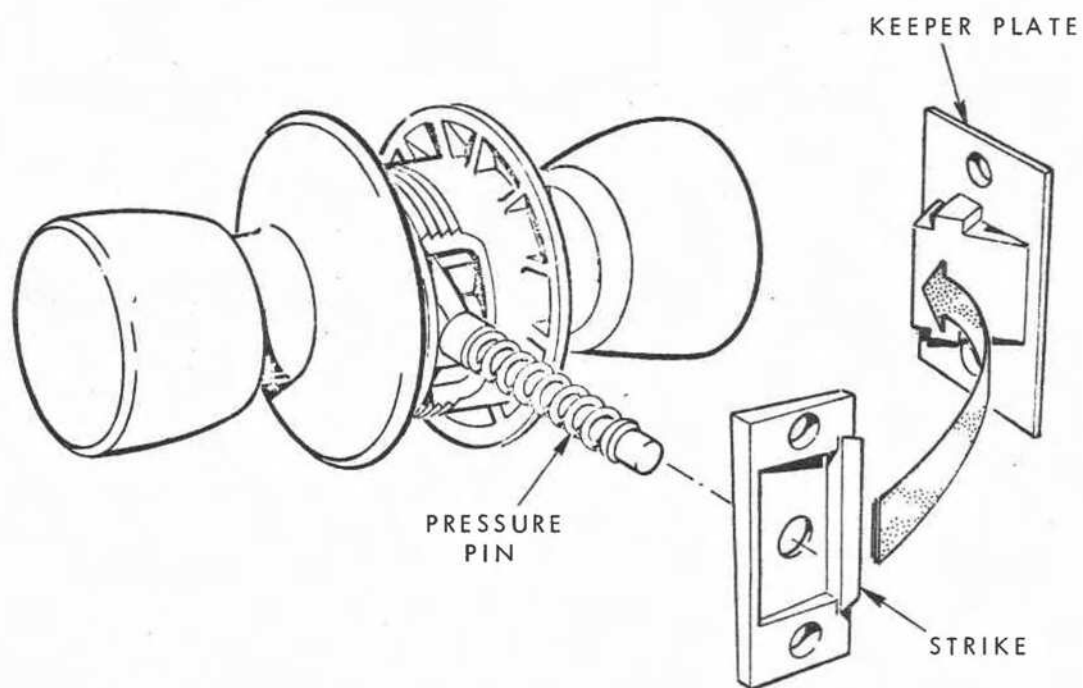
B TYPE 2 LATCH MECHANISM IN DOOR JAMB
